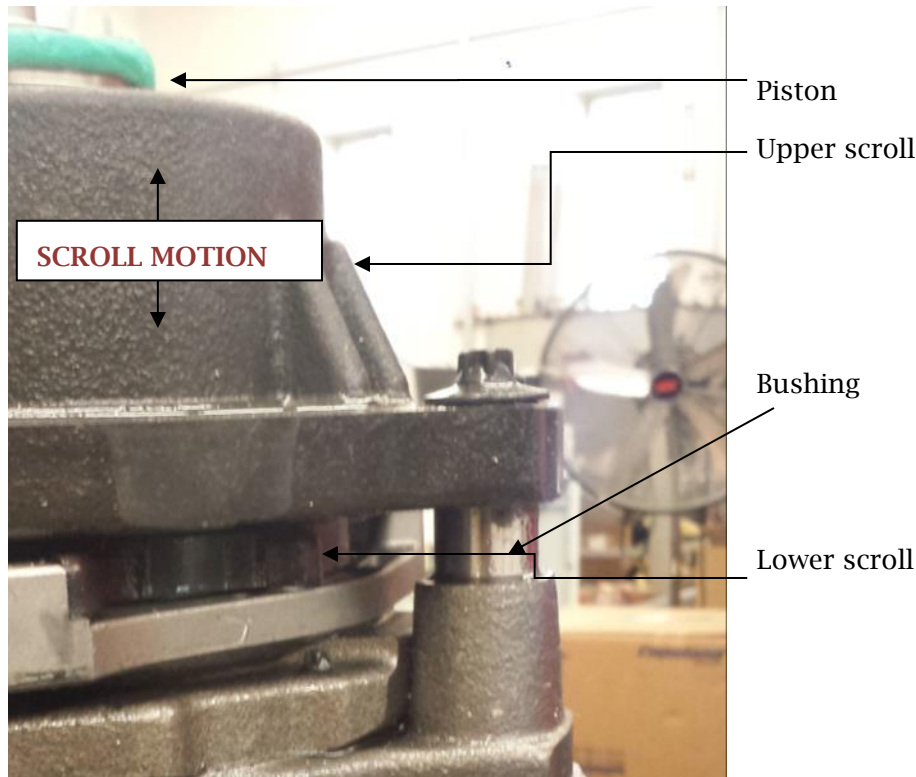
BEECH Expander/Compressor, as Modified for Testing
